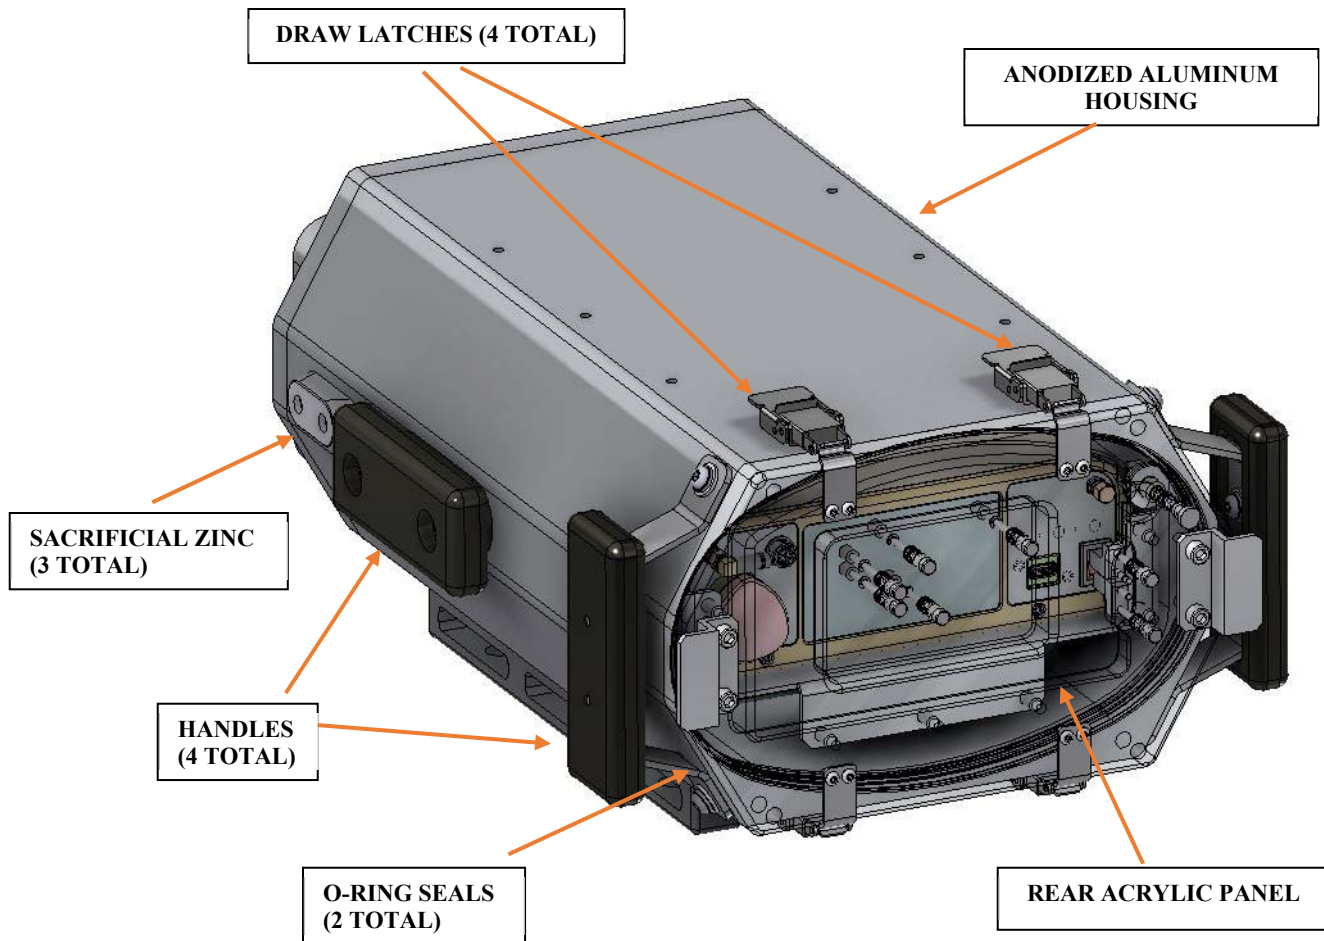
ASM512-500 & ASM1024-500 Housing, Rear View
